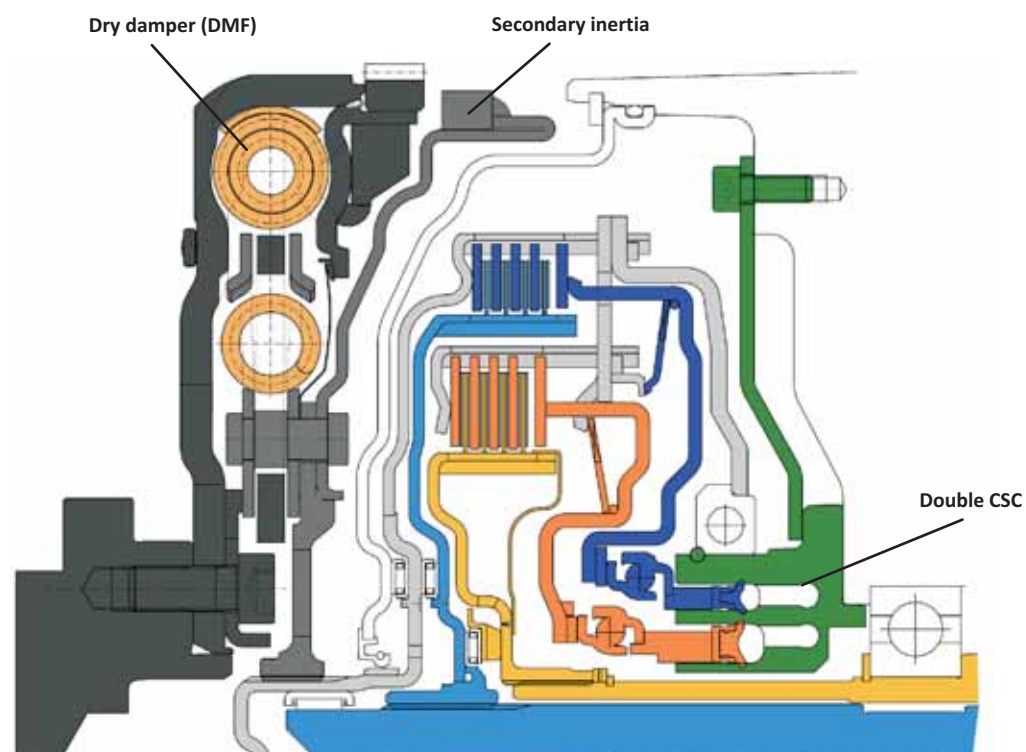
Wet double clutch with double concentric slave cylinder and dry DMF
